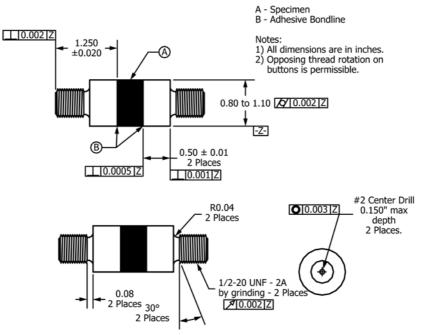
Drawing of End Tabs and Cylindrical Specimen Assembly (inch-pound units)
